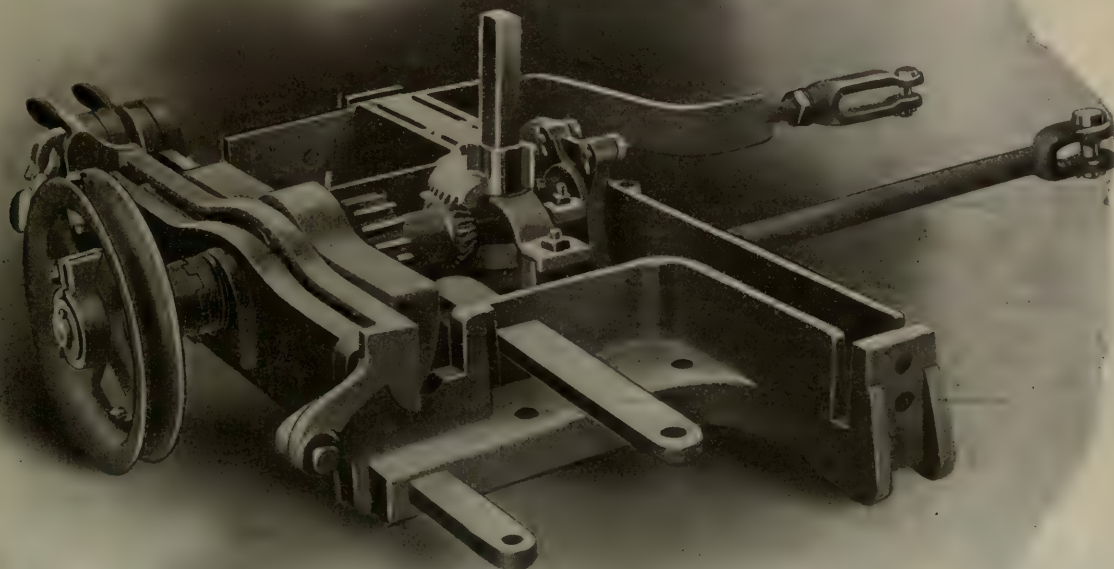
Triplelock Switch Machine Open, Showing Wheel and Derail Movement of Lock.
